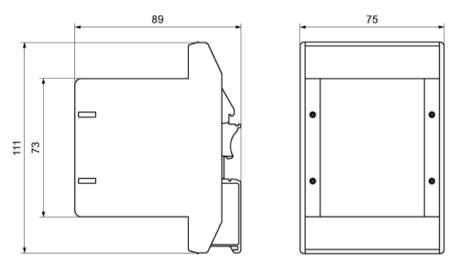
Dimension drawing of the Safe Brake Adapter (data in mm)
